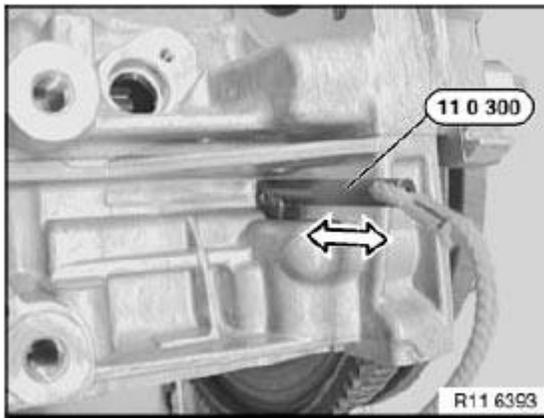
Sliding Special Tool 11 0 300 Into Bore For Securing Crankshaft
